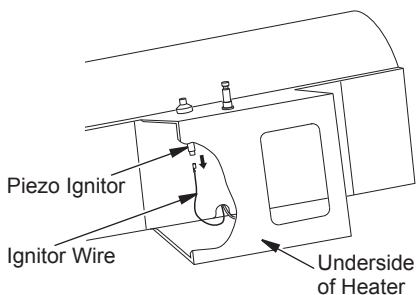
Removing Ignitor Wire from Piezo Ignitor
